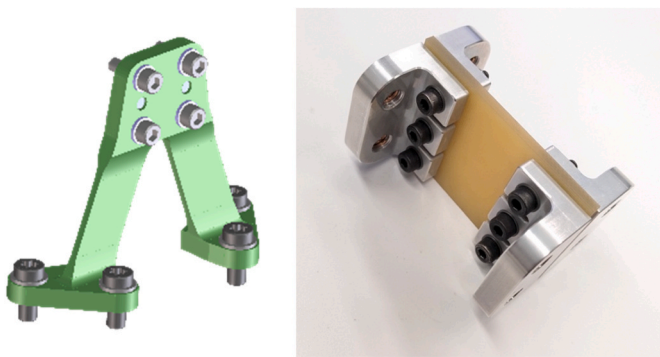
Preliminary 3D drawing of the interface feet to the S/C (left) and picture of one of the flexures between cold and warm section (right).
